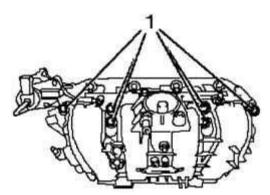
Bolts fastening intake manifold: 1 - screw fixing
